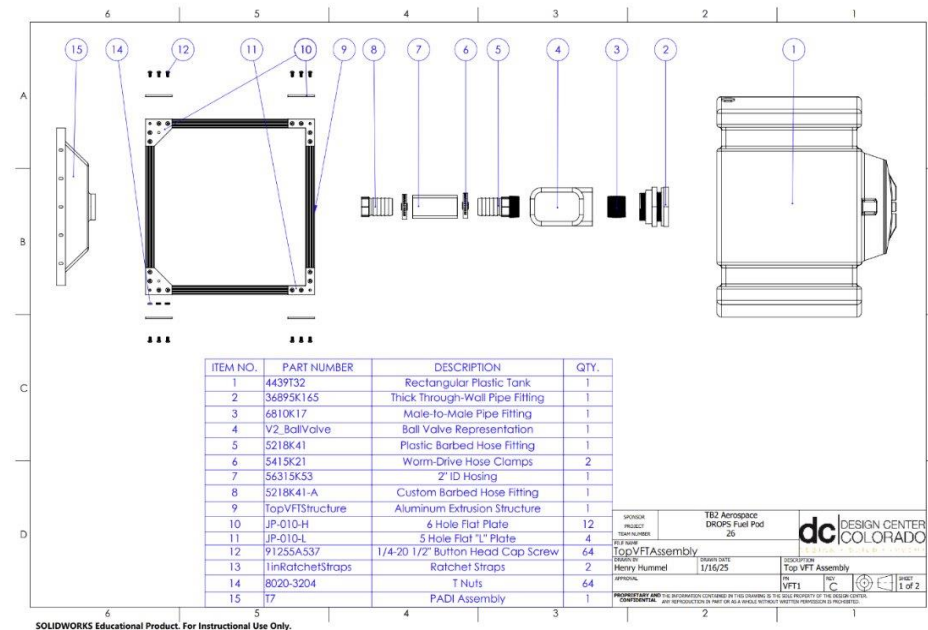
Assembly drawing with BOM for top half of test rig (full rig is a stacked top and bottom).
